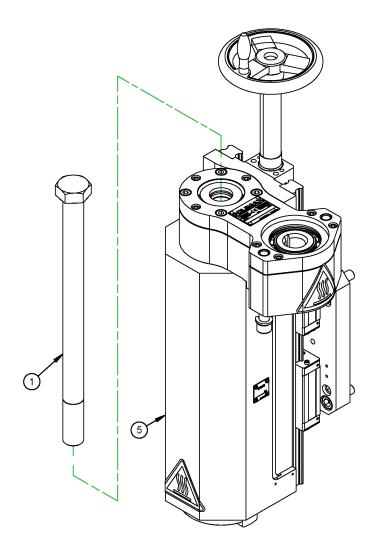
MILLING ARM ASSEMBLY (P/N 72698)
